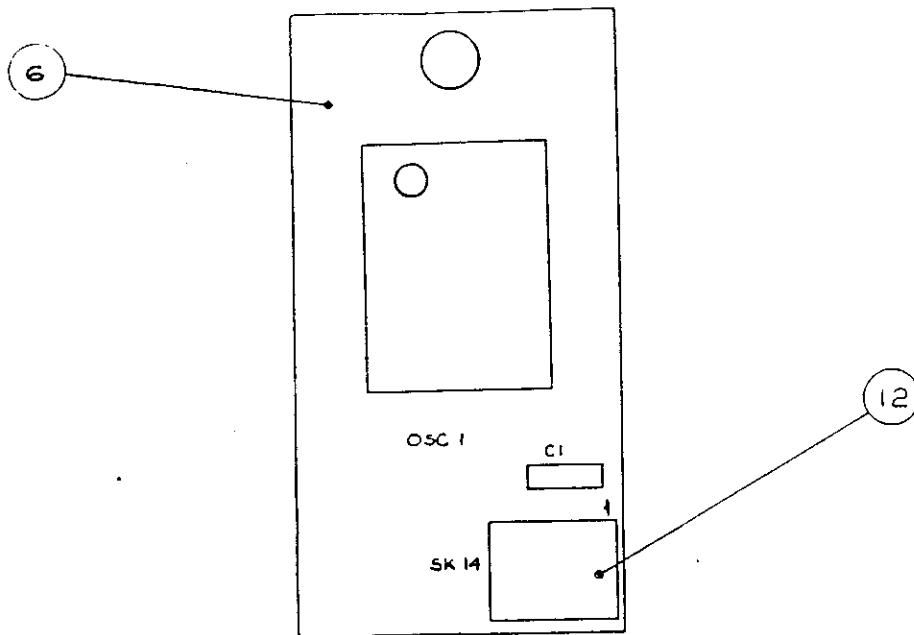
Oscillator Assembly, Standard (19-1147)
